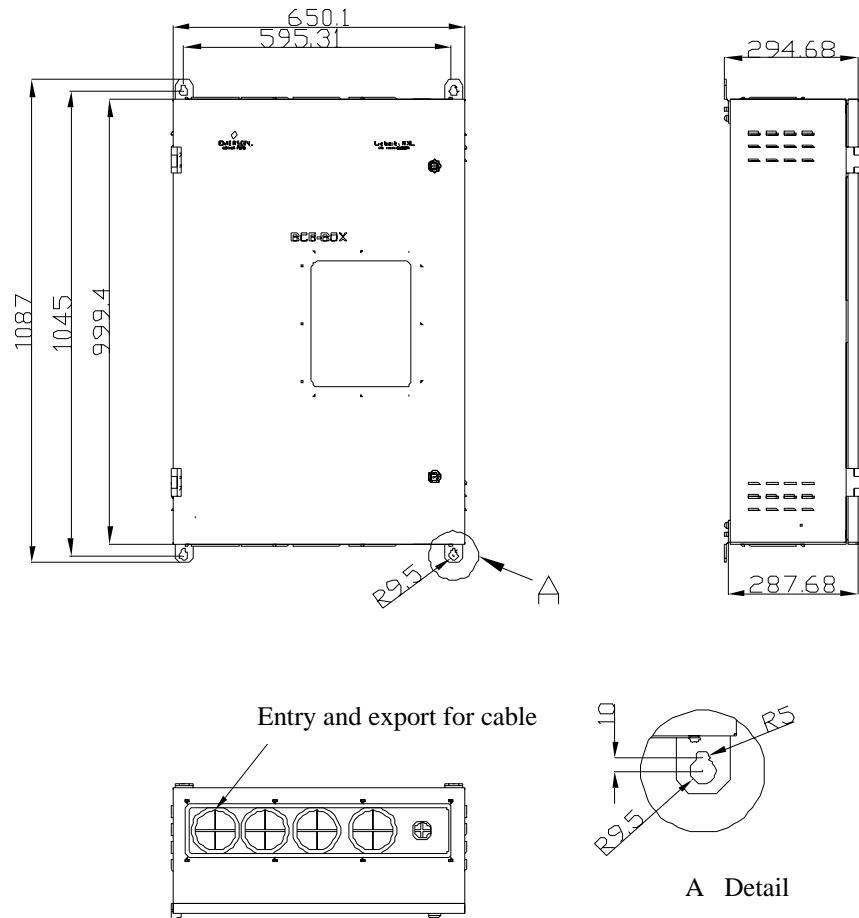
2 Installation hole dimensions for battery cabinet of 500kVA UPS (Unit: mm)
